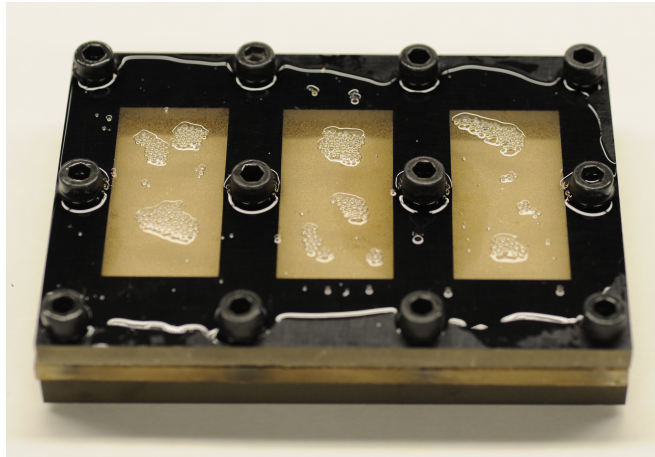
The mold used to make PDMS pieces for laser micromachining.
